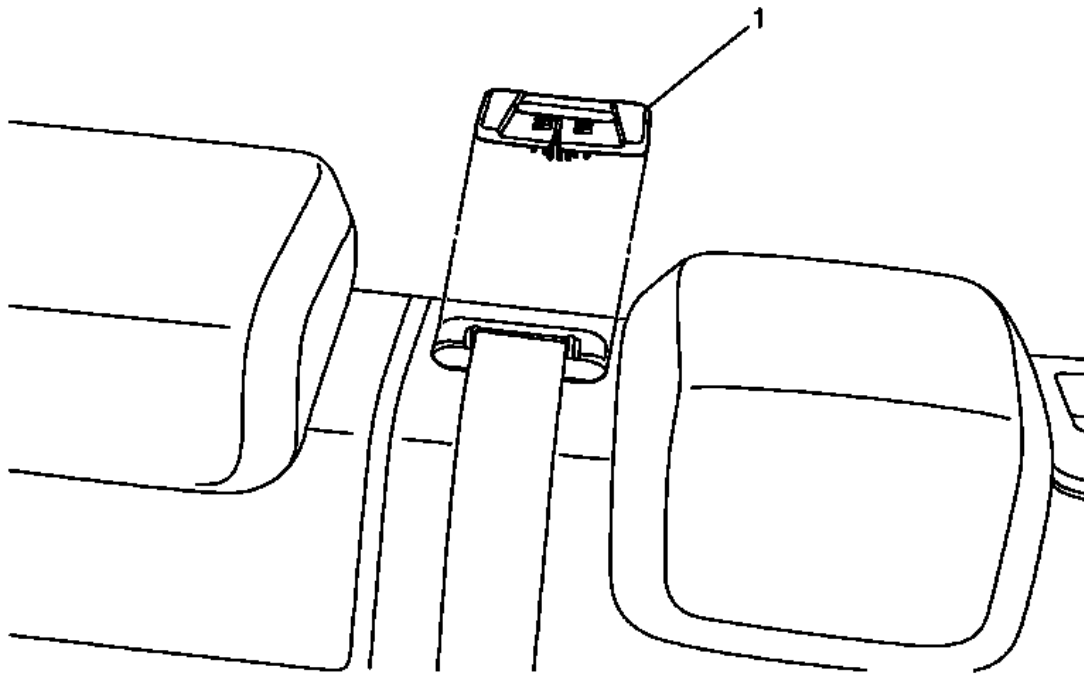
Rear Seat Shoulder Belt Opening Cover
